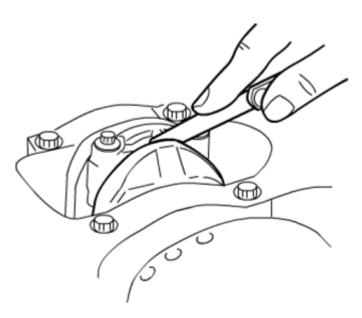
Checking Big-End Side Clearance Of Connecting Rod Courtesy of SUZUKI OF AMERICA CORP.
